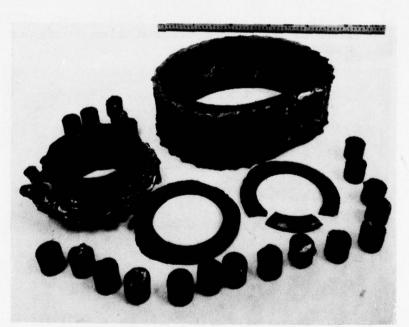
Lower planetary pinion, bearing inner race, rollers, roller guides, and retainer after 54-minute loss-of-lube test of optimized transmission configuration number 2.
